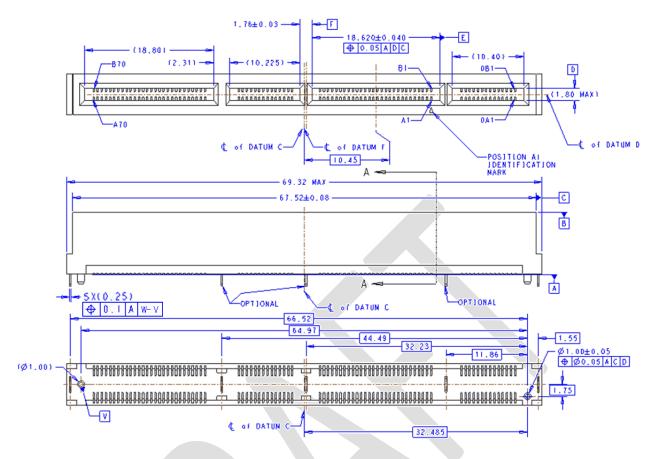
4C+ STRAIGHT CONNECTOR DIMENSIONS
